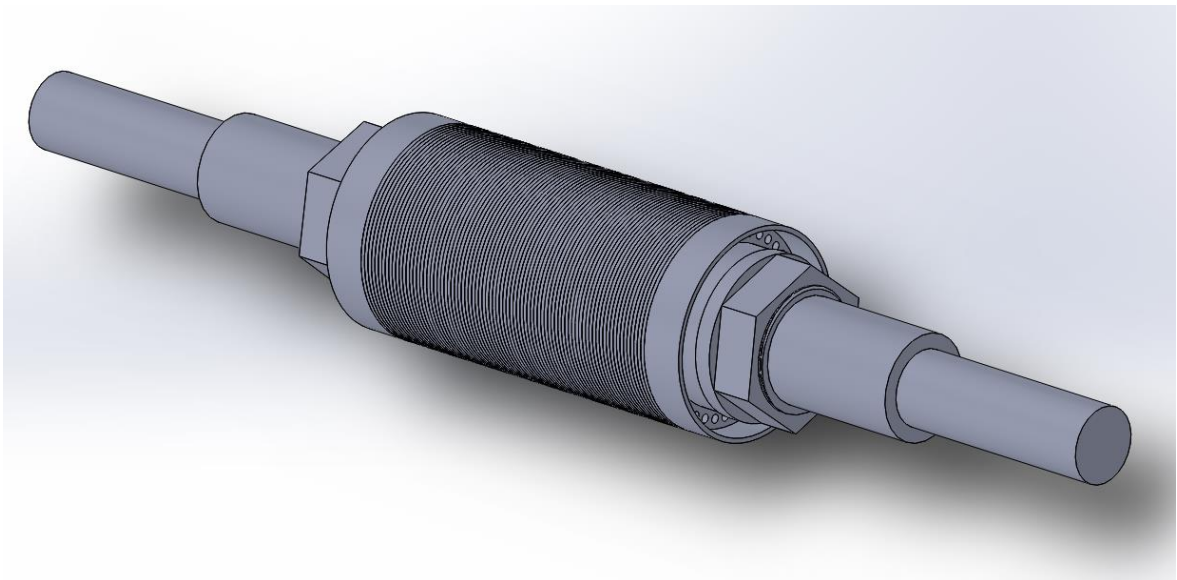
Approximate model of the assembled rotor consisting of shaft, lamination disk stack, end disks and end disk nuts.
